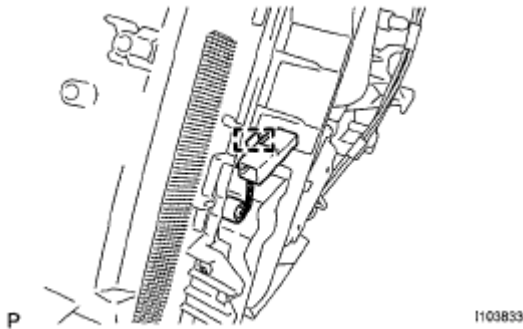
Identifying Evaporator Temperature Sensor Connector Clamp
